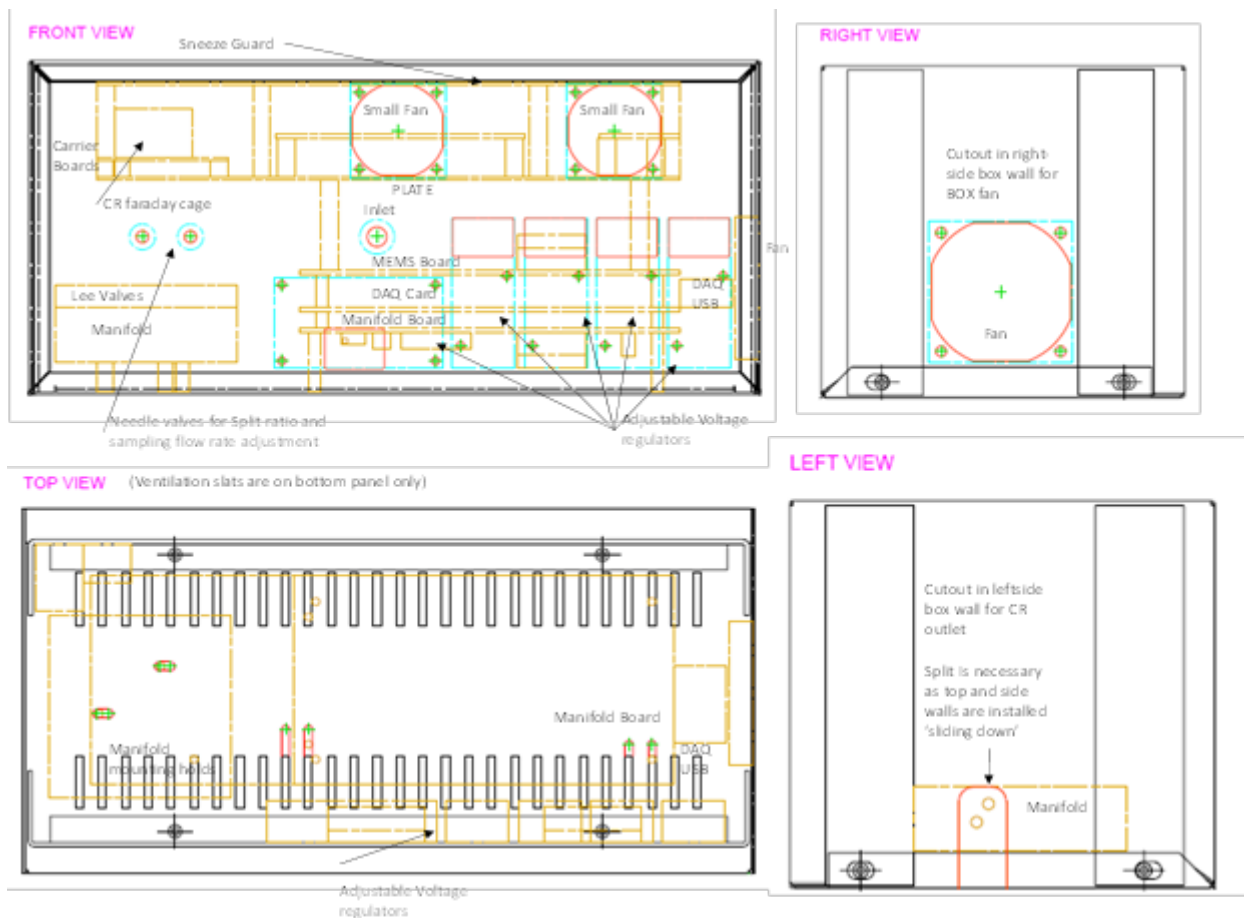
Engineering schematic of the layout of PEMM 1 prototype system, with electronic and fluidic components, as well as mounting holes, overlaid and labelled. Voltage regulators mounted onto front panel can be viewed and controlled from outside the enclosure. Needle valves are bulkhead mounted onto front panel for easy adjustment of split ratio and sampling flow rate. Fan on right panel operates continuously to cool electronic PCBs, while dual smaller fans at top of front panel operate post-analysis only to cool the  $\mu$ PCF and  $\mu$ columns, respectively. Effluent from the system exists the manifold from left panel, and can be plumbed to reference detector. Image courtesy of Nicolas Nuñovero.
